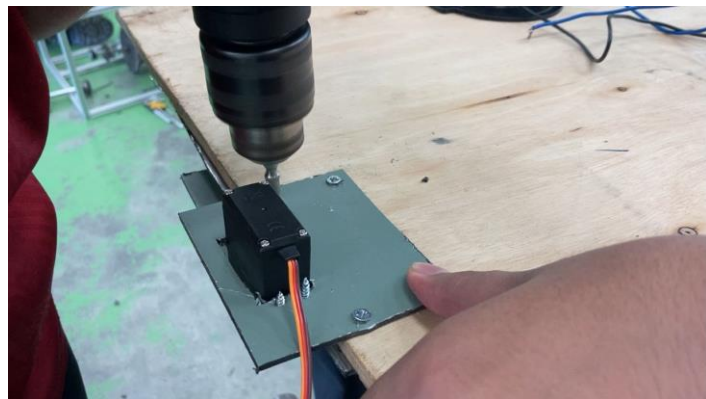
The servo motor with its handle is attached to the back of the board so that it can push the ring.
